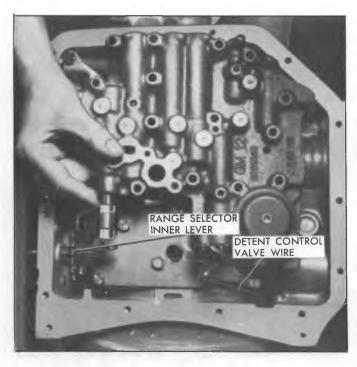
M--Removing Manual Control Valve Link, Valve Body and Detent Actuating Lever
